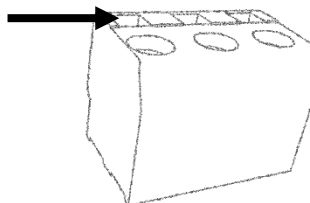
Insert a small bladed screwdriver before inserting the conductor wire.
